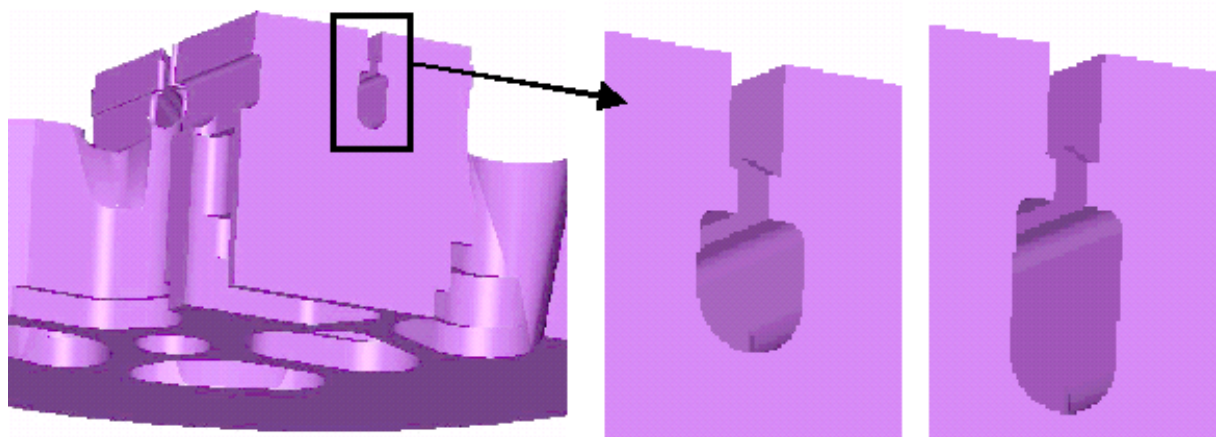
the two different weld chambers. (a) shorter chamber (b) longer chamber
